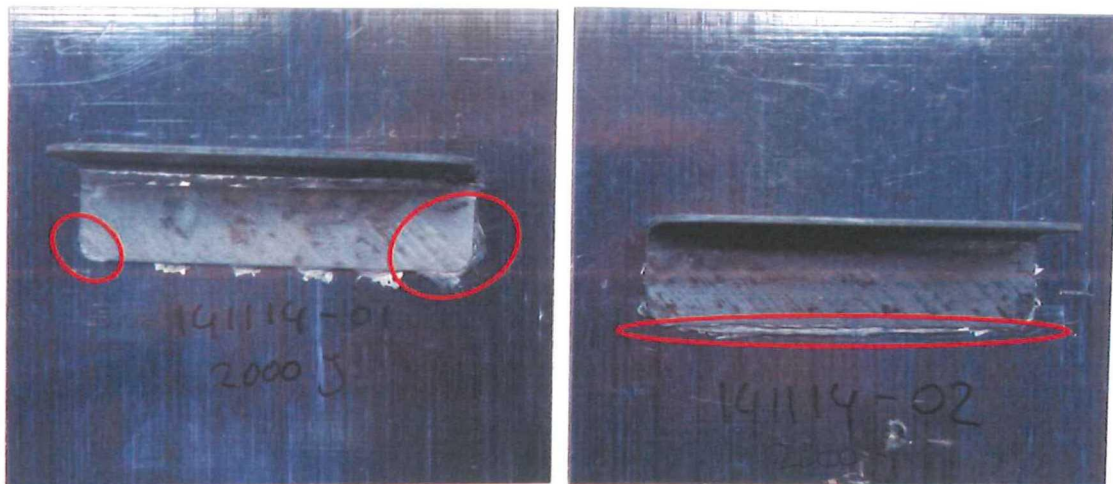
A clip welded with ED configuration 1 (left) and a clip welded with ED configuration 2 (right). It can be observed that clip welded with ED configuration 1 is damaged at the sides, and the one welded in configuration 2 is slightly damaged at the lower edge. The damages are indicated with the red ellipses.
